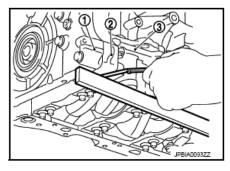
Checking Surface Height Difference Between Front Timing Case, Oil Pan (Upper)
